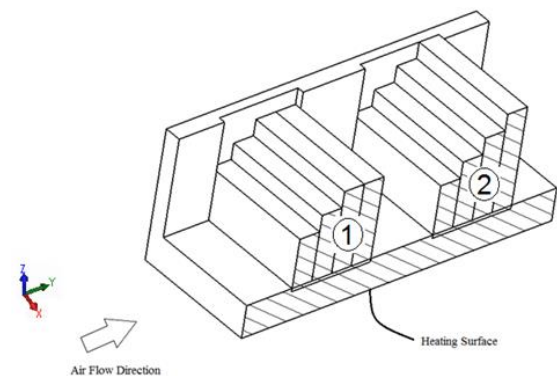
The cross section view of the designed foam embedded heat sink specimens
